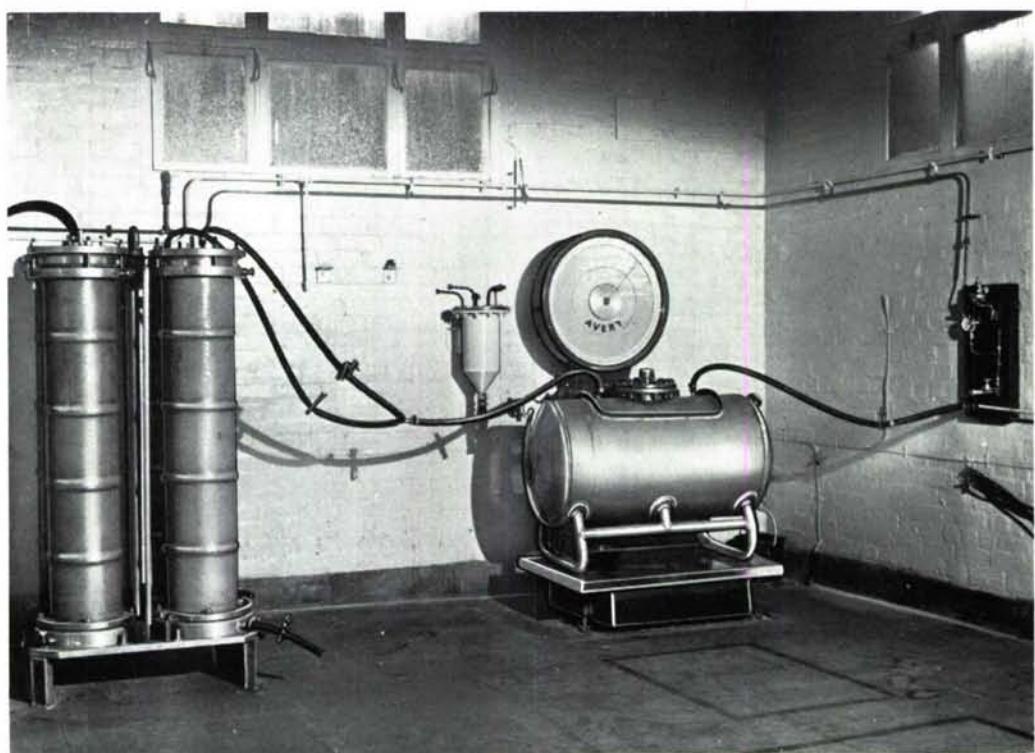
Casting assembly for large rocket motor about to be filled with powder
